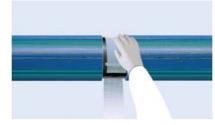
Wind the wrapping tautly around the weld area until it is flush with the protective coating
